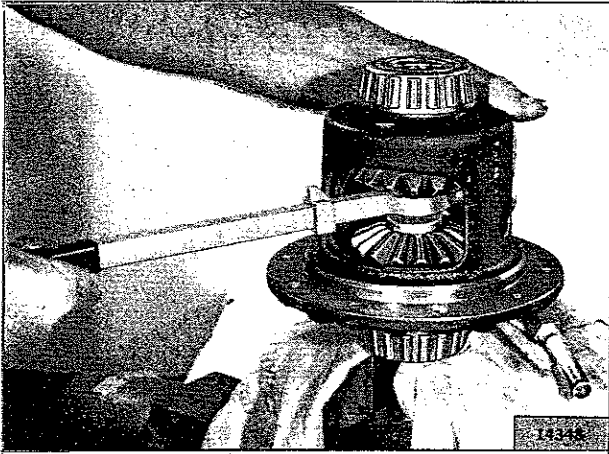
POSITIONING GEAR ROTATING TOOL
